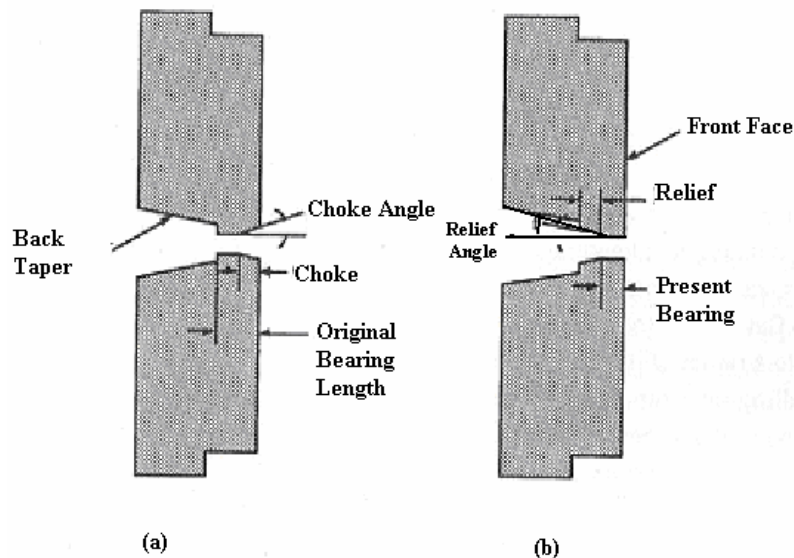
Choke and relief in die bearing. a) Choke at front of bearing. b) Increased relief angle at the back or exit side of the bearing [5]
